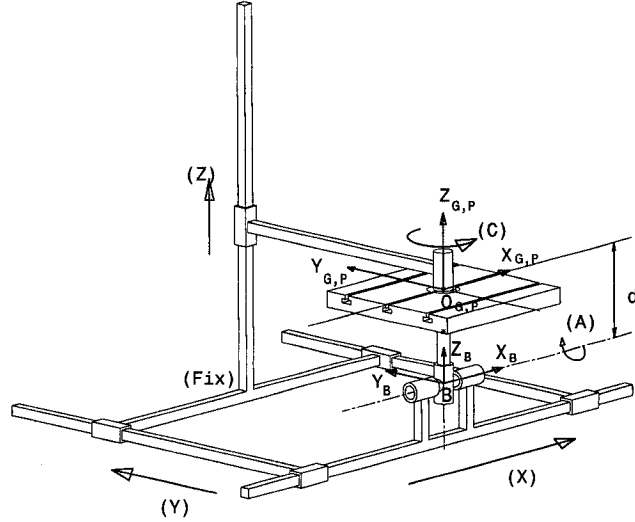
Geometry of the Matsuura 5-axis milling center without tool at home position
